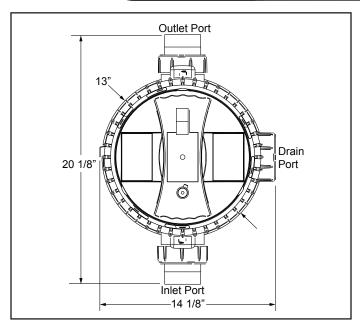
Dimensions, CS Cartridge Series Filter - Top View
